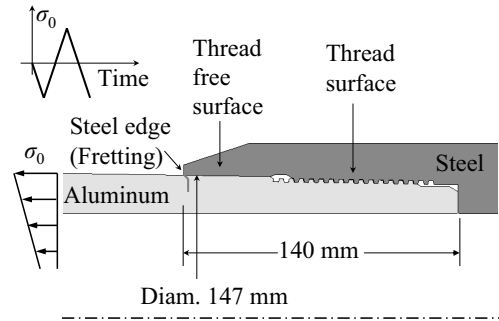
Fretting fatigue site, where the crack nucleates.
